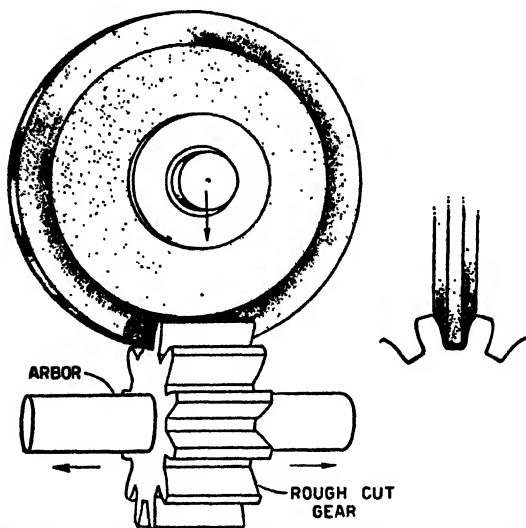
Gear grinding. (*The Socony-Vacuum Oil Company*)
